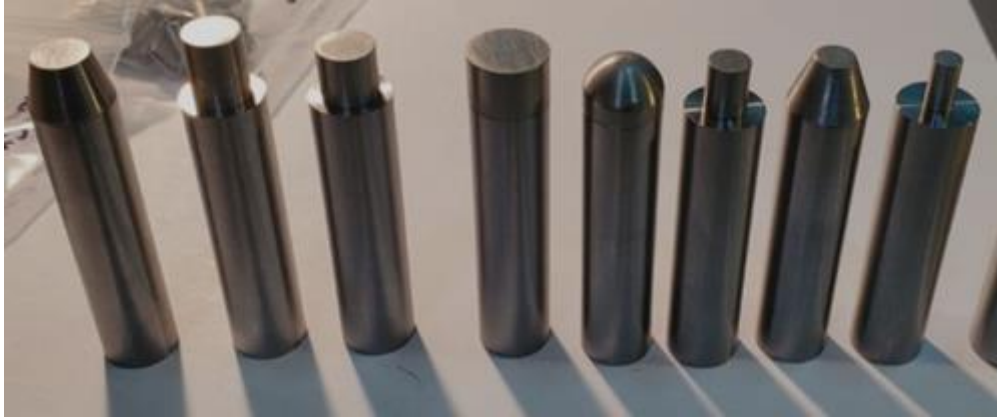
Machined core tips attached to pure iron machined cores – before winding
